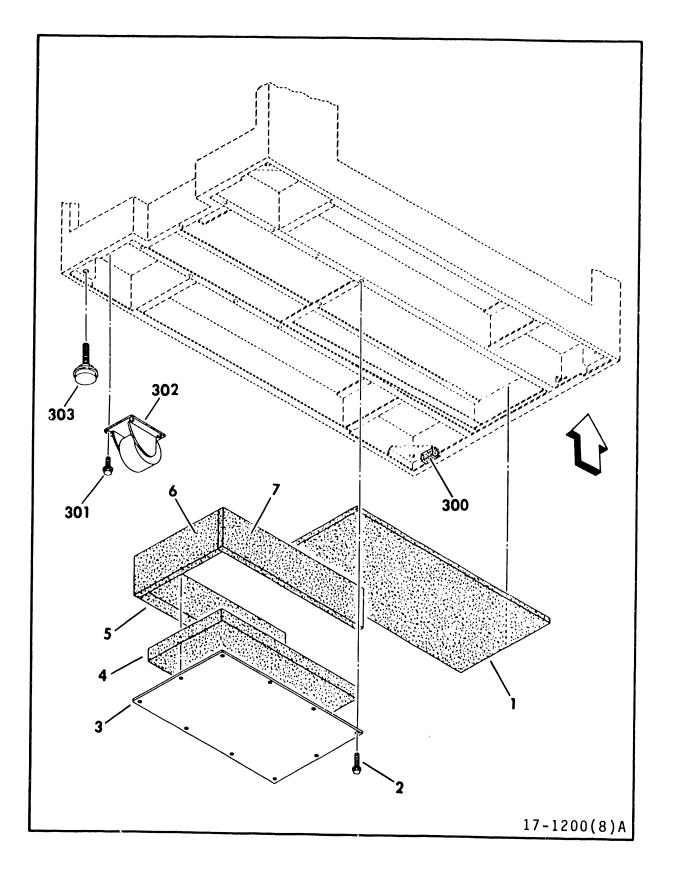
A-12. Frame & Air Assembly (Sheet 9)
